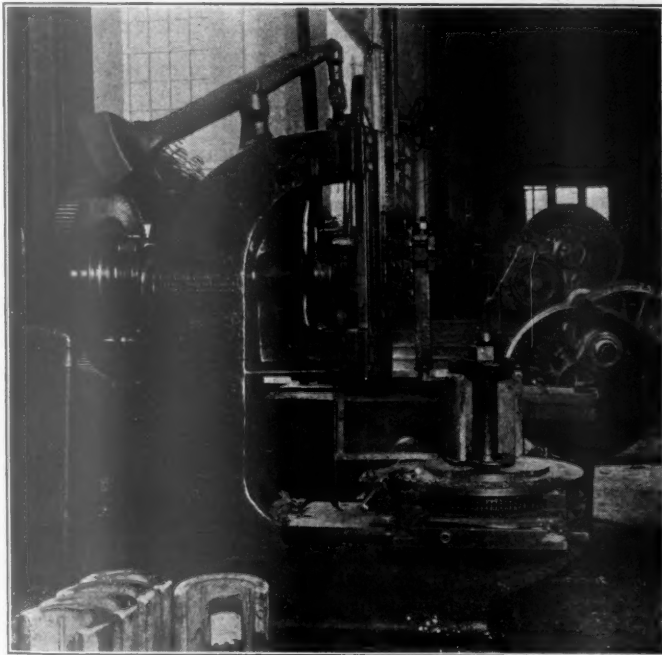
Slotter Arranged for Rapid Machining of Crown Brasses
